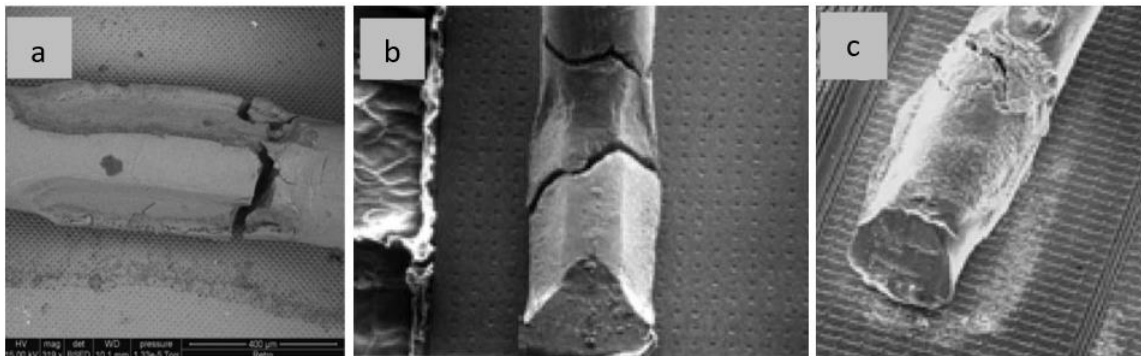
Bond wire (a) Heel crack (b) Heel crack due to low-cycle fatigue stressing (c) Heel crack due to improper bond wire coating [45], [51]
